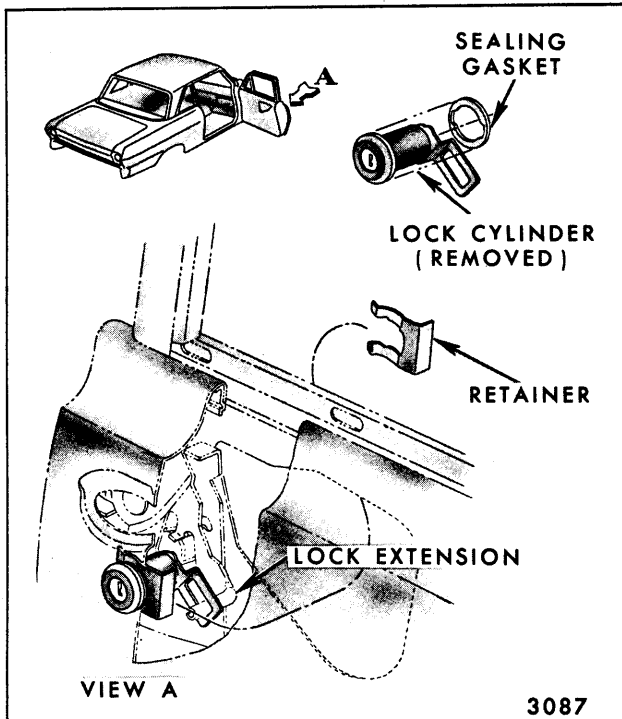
Front Door Lock Cylinder Removal - All Styles
